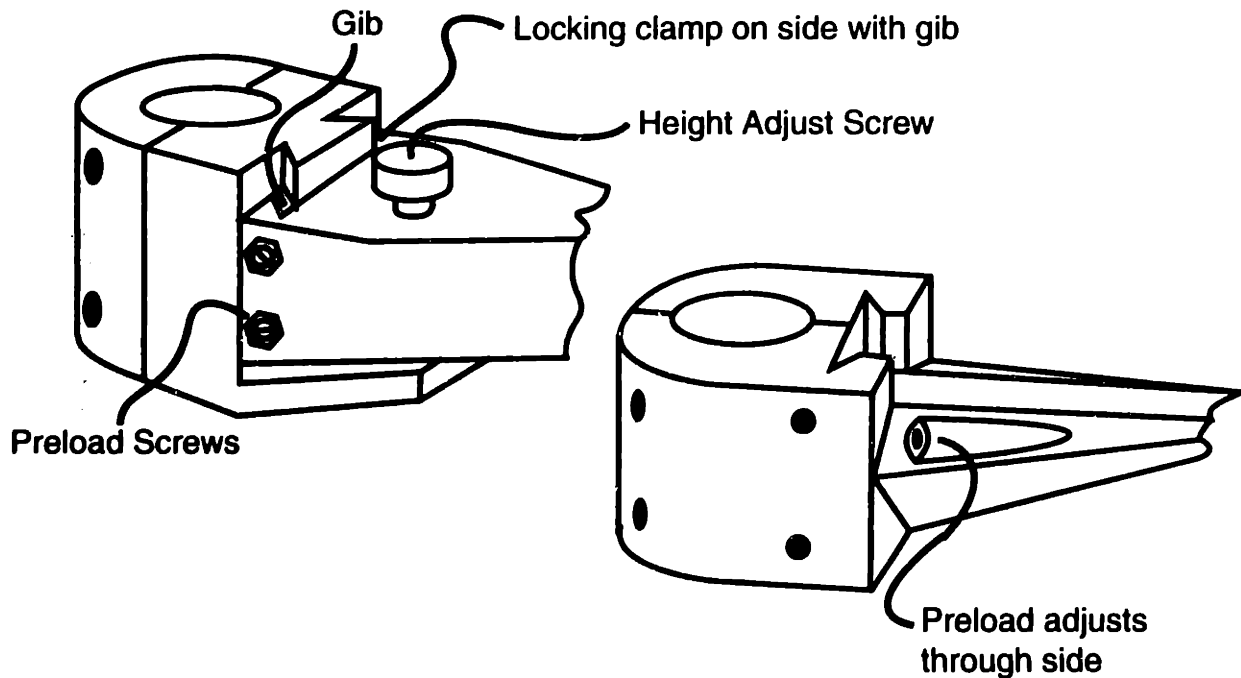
Concept 4 - Linear bearings, external to shaft.
